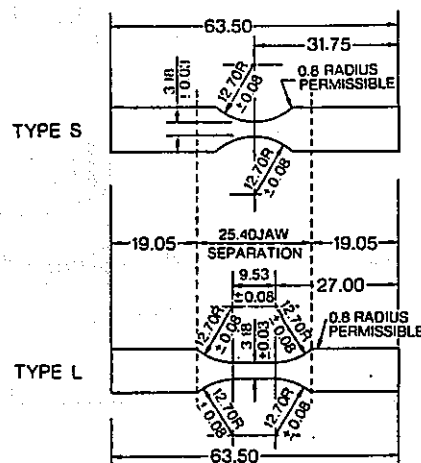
Dimensions of types S and L tension-impact specimens (Dimensioned in millimeters).
